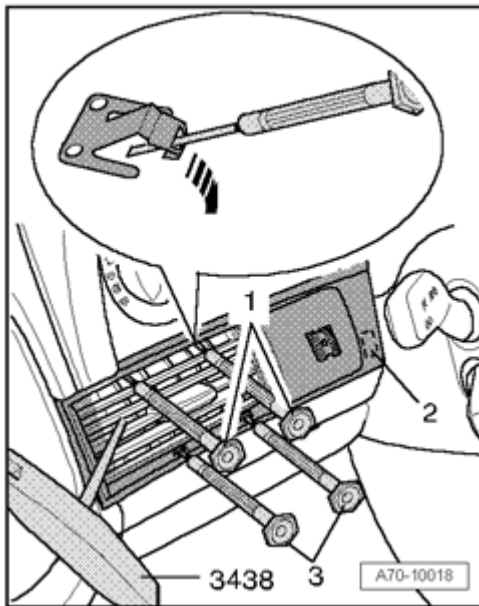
Releasing Spring Pins Of Decorative Panel From Instrument Panel Using Trim Removal Wedge 3409
